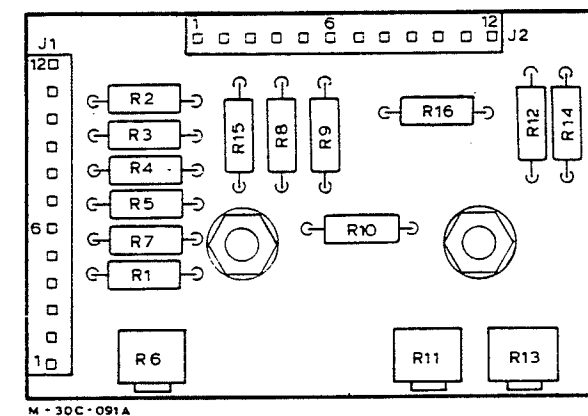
Assembly Detail - NAPC8/1 Meter PCB Assembly
